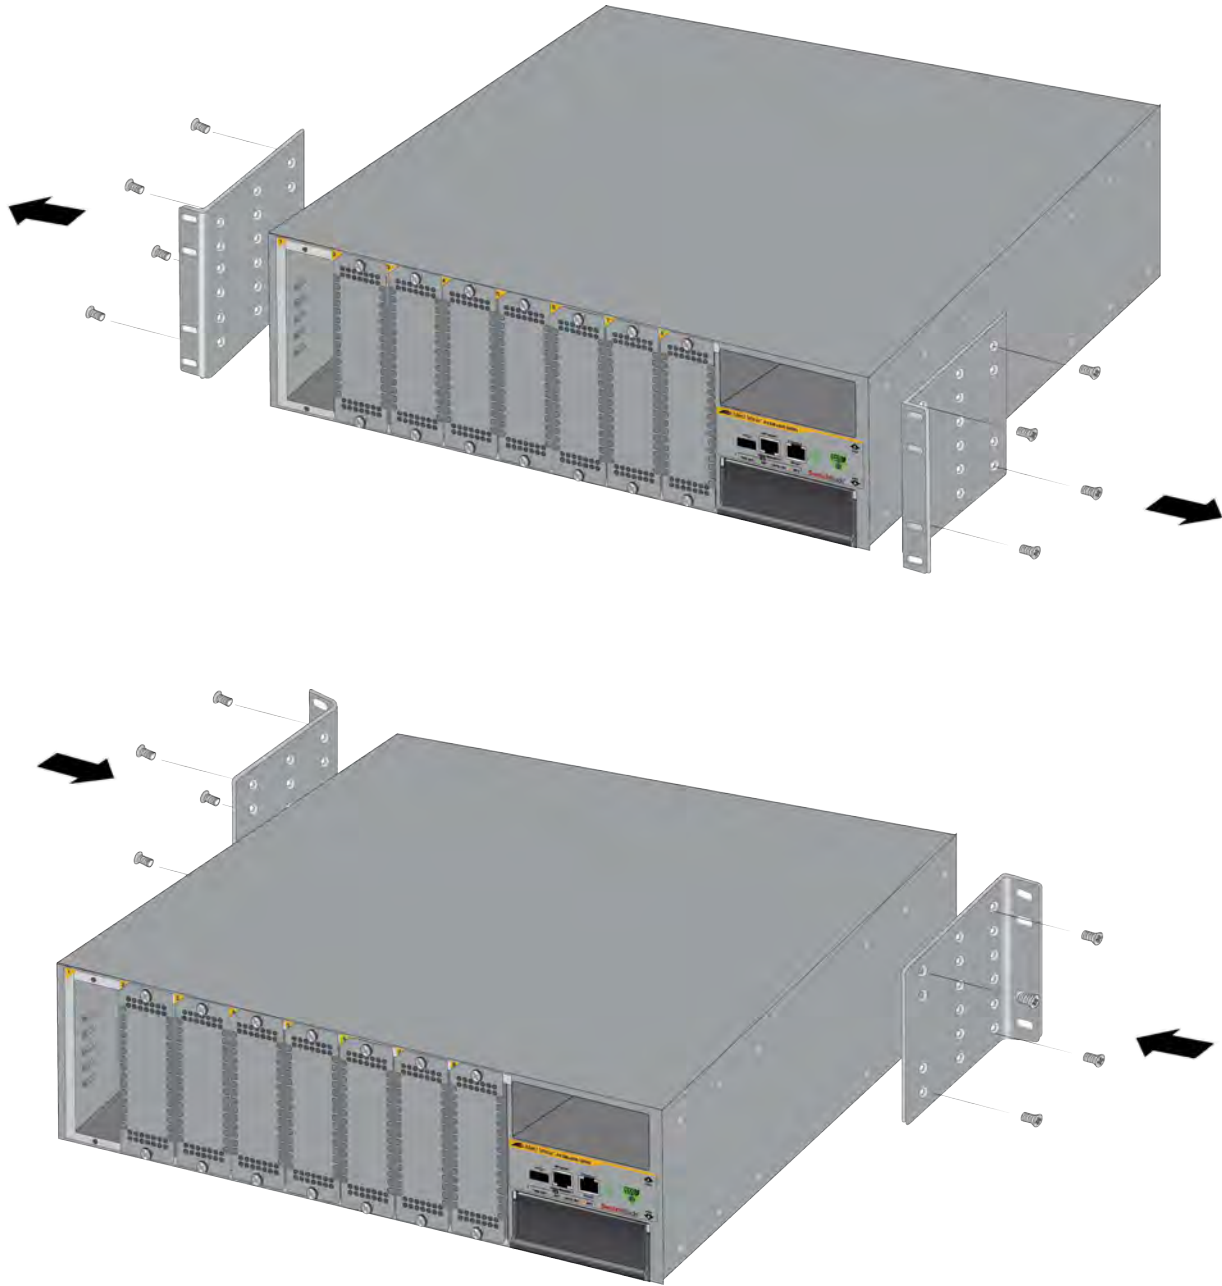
Example of Adjusting the Equipment Rack Brackets on the Switch
